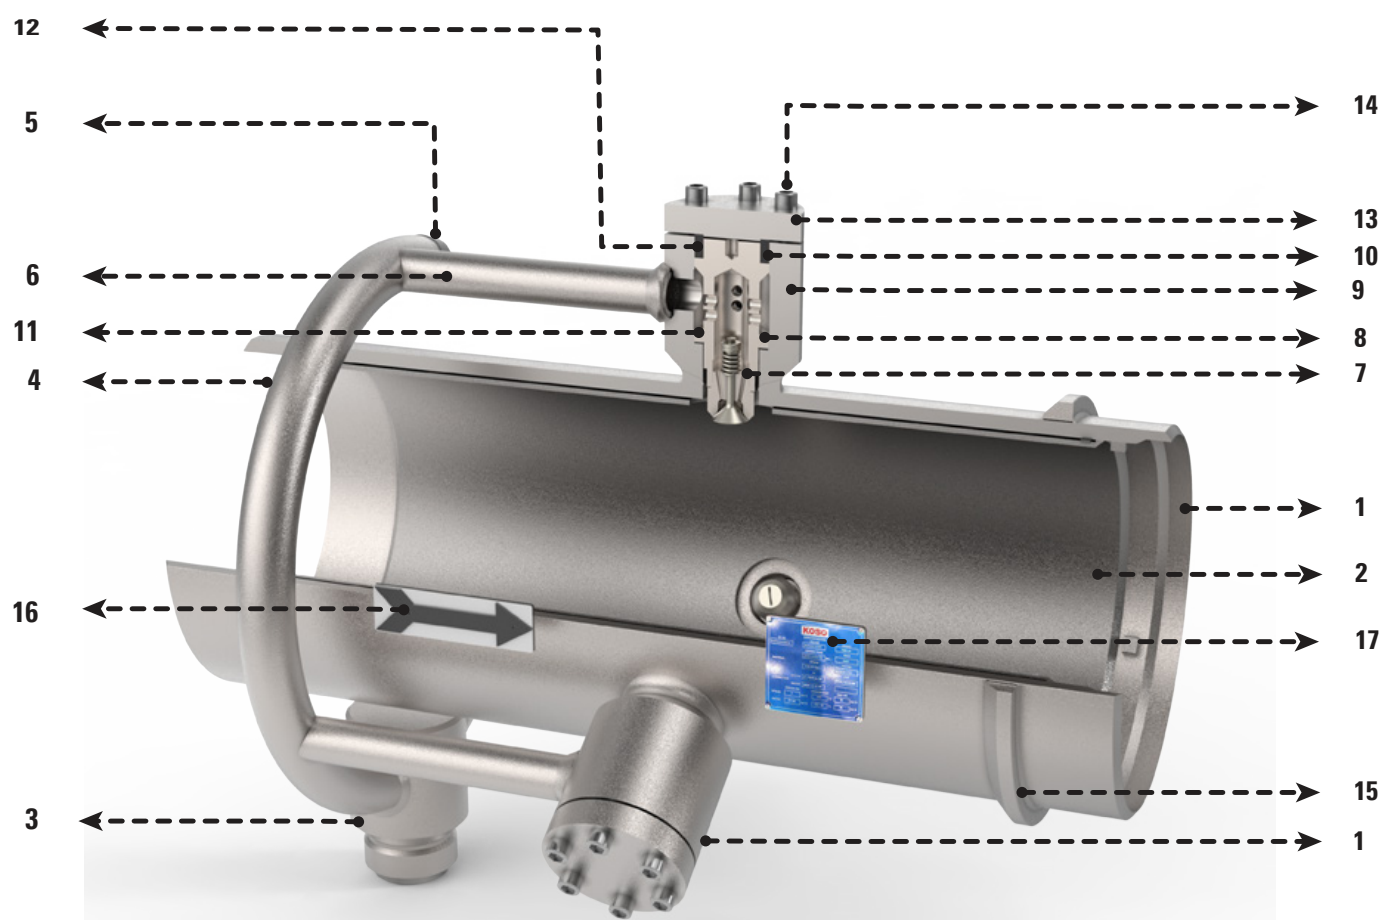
DMR Multi-Nozzle Ring Cross Sectional View
